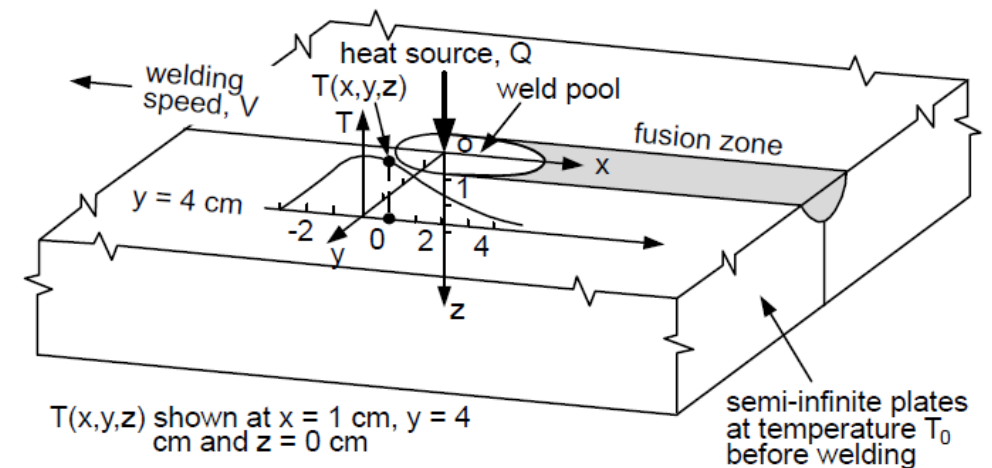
Three-dimensional heat flow during welding of semi-infinite workpiece.
